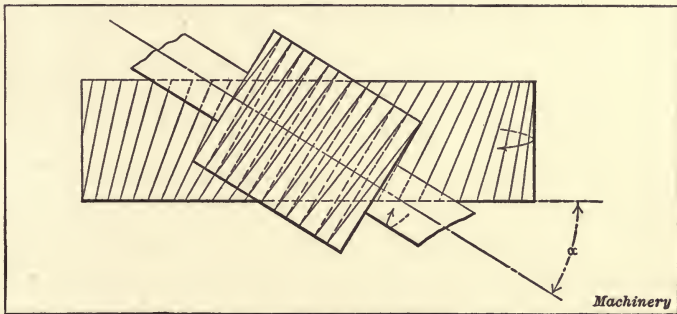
Cutting a Right-hand Spiral Gear with a Left-hand Hob
